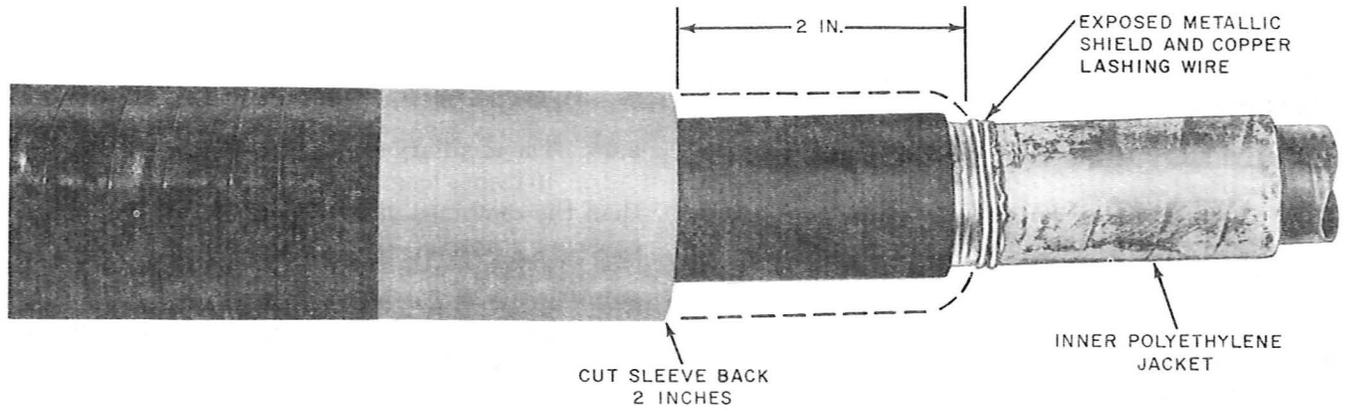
Auxiliary Sleeve Cut Back 2 Inches
